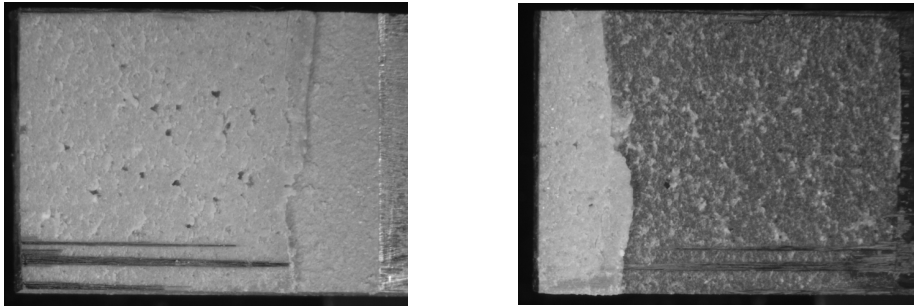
Fracture surfaces of a CFRP-aluminium SLJ.
